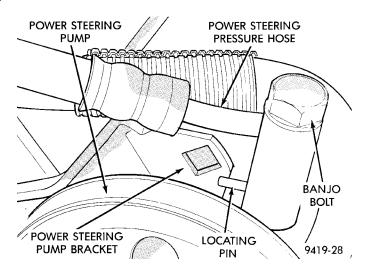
Power Steering Hose Attachment To Power Steering Pump
